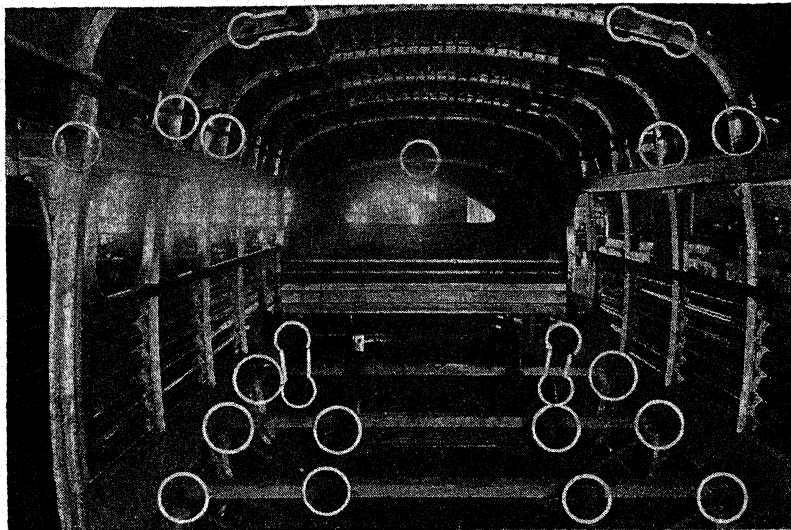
Inside view of body with paneling attached. Circles indicate arc welded joints.
